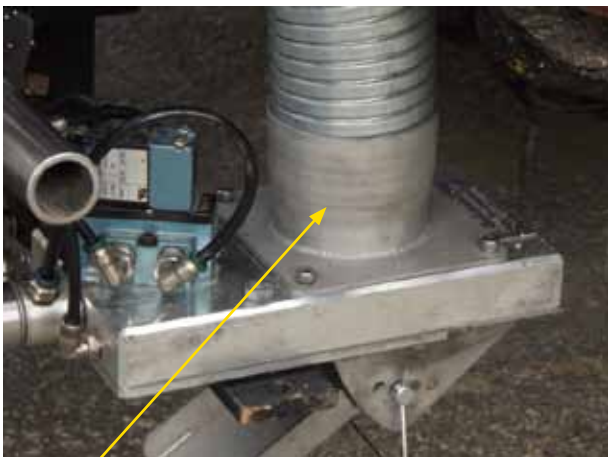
Test fit the flex hose to insure it seats completely inside the funnel on the dispenser. Adjust hose position as needed.
